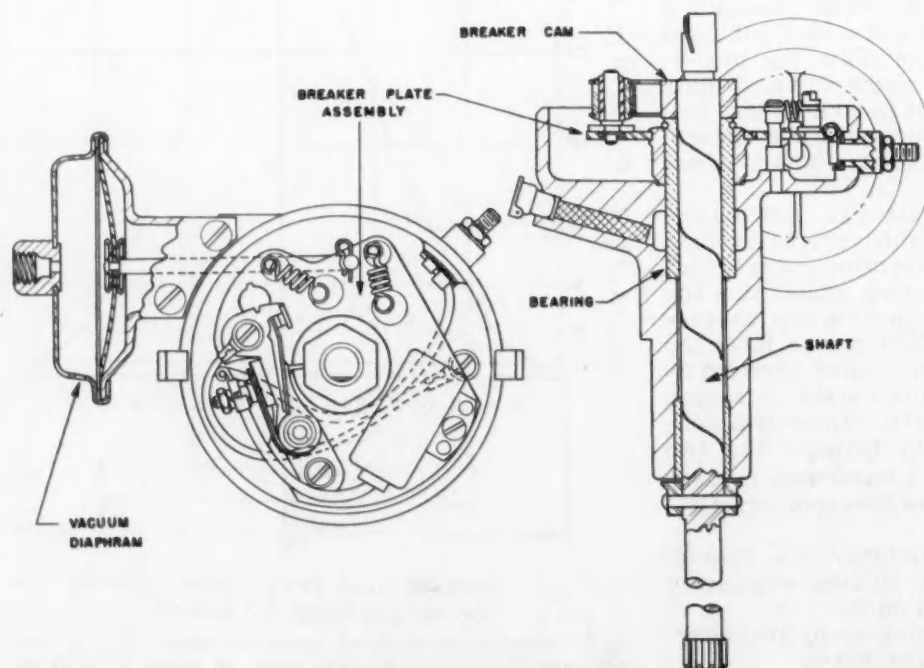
Constructional details of full vacuum controlled distributor showing principal assemblies
